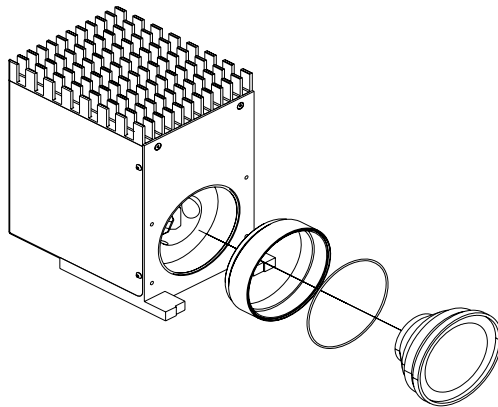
Exploded view of the lens mount assembly with optional F/160 YAG lens.
